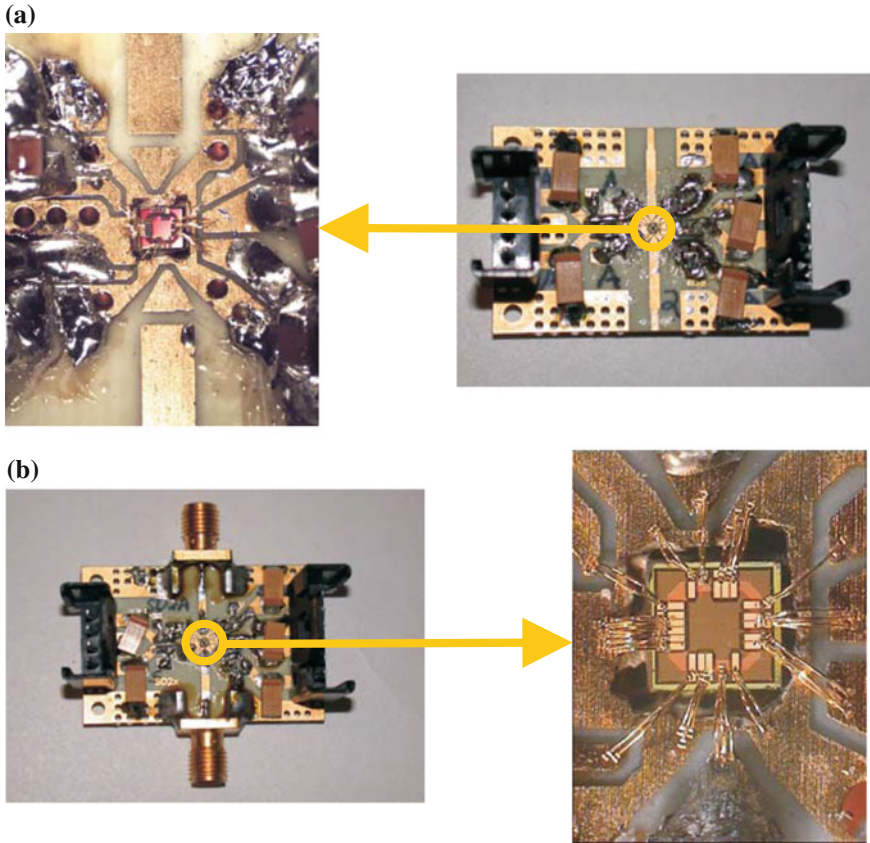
Test boards with voltage buffer chips. a Test board for measurements with high-frequency probe needles, b Test board for linearity and step response measurements
